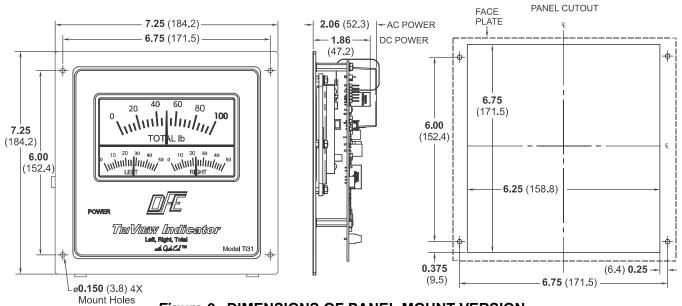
DIMENSIONS OF PANEL MOUNT VERSION
